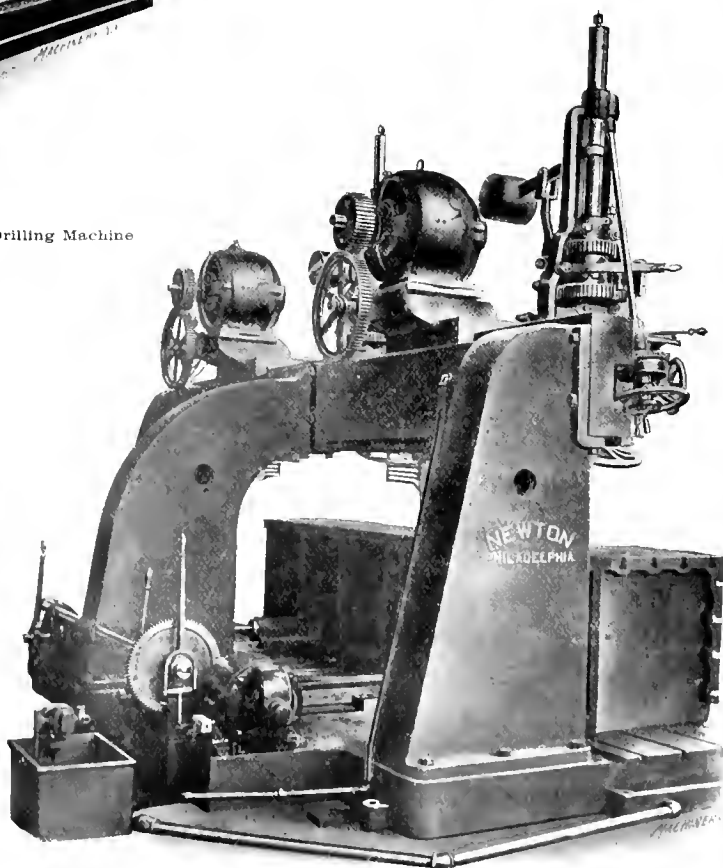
Rear View of Newton Two-spindle Drilling Machine, showing Motor which operates the Adjustable Work Tables
